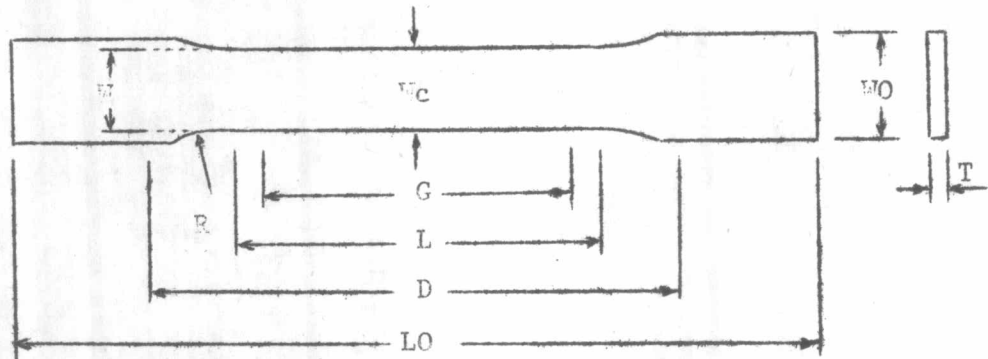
DIMENSIONS OF TENSILE TEST SPECIMENS
